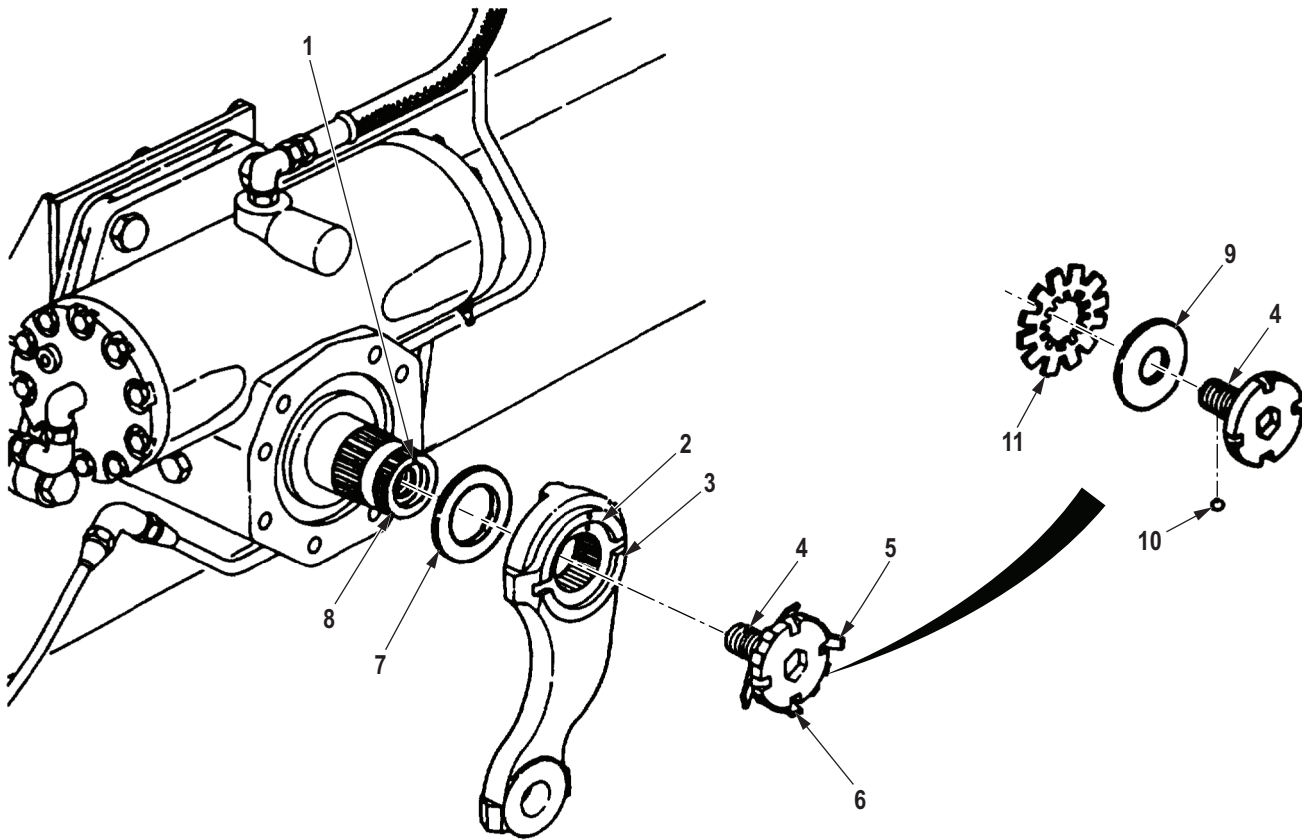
Steering Gear (Sheppard) and Mounting Bracket Installation (M939A2).
